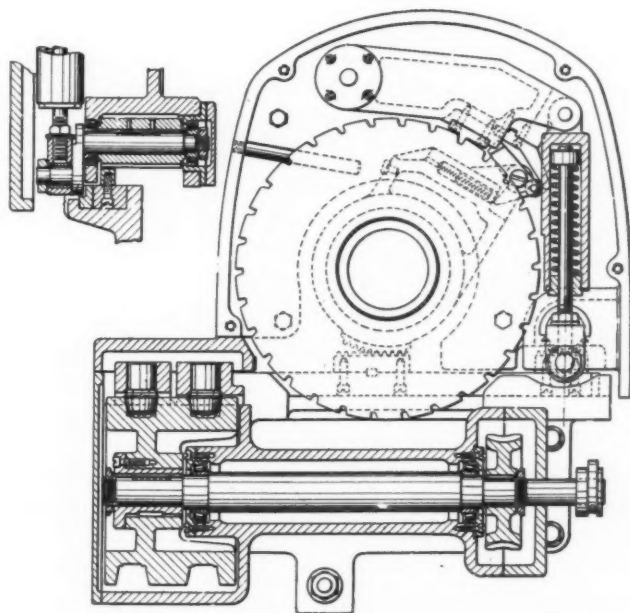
Indexing mechanism, designed for gear-cutting machines, operates silently and automatically
